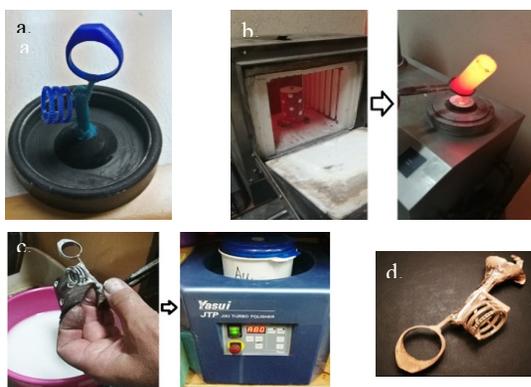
View of the stages of raw casting production: a - resin model, b - burning and mould pouring, c - cleaning and polishing of the cast, d - raw casting after cleaning
